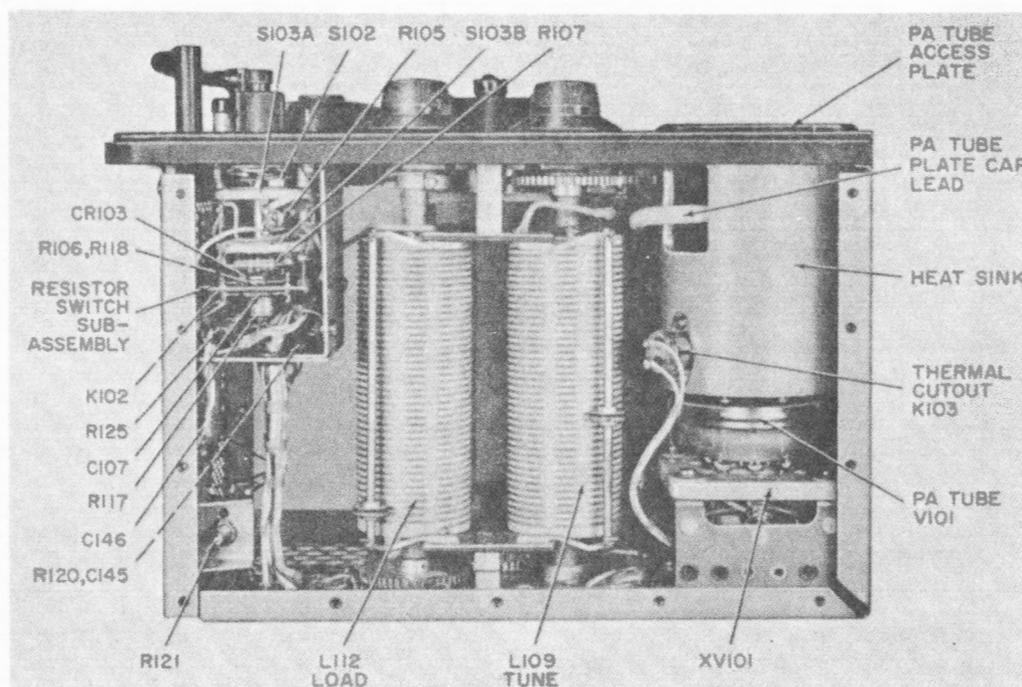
Power Amplifier Compartment, Bottom View, Parts Location
